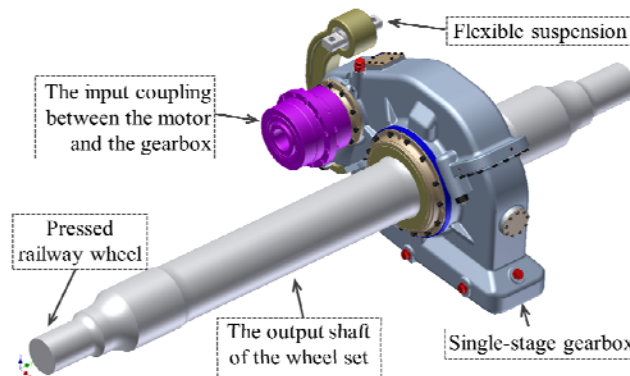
Single-stage gearbox AGV-250 with coupling and wheel-set output shaft
